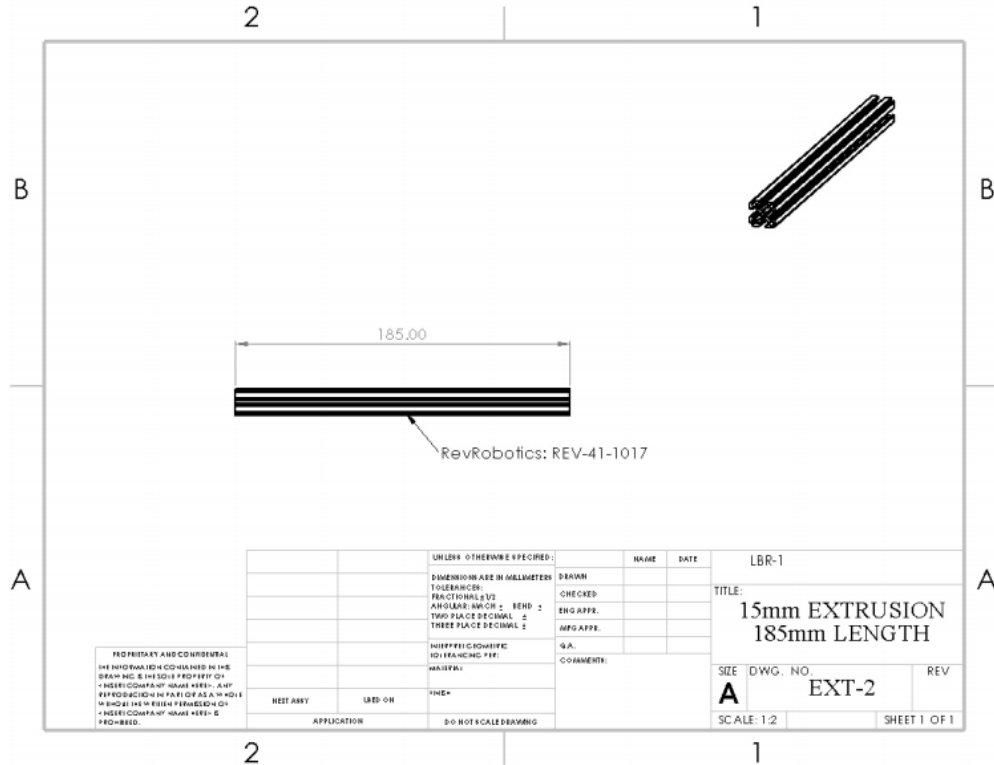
Part drawing of the 15mm extrusion for the linear slide assembly.
